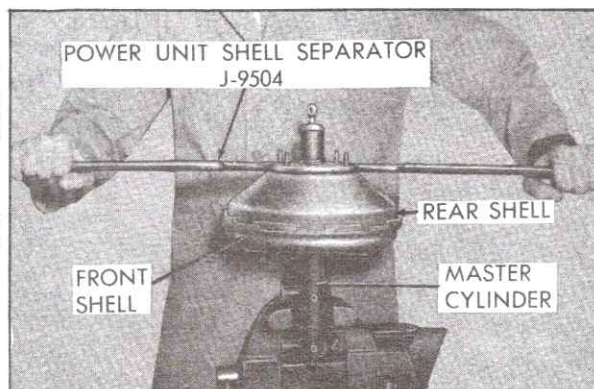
Removing Delco - Moraine Power Head Rear Shell
